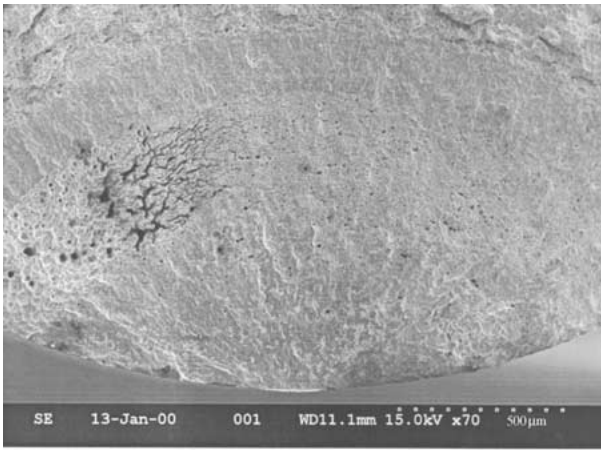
Crevice corrosion at fracture surface of pre-cracked specimen.
